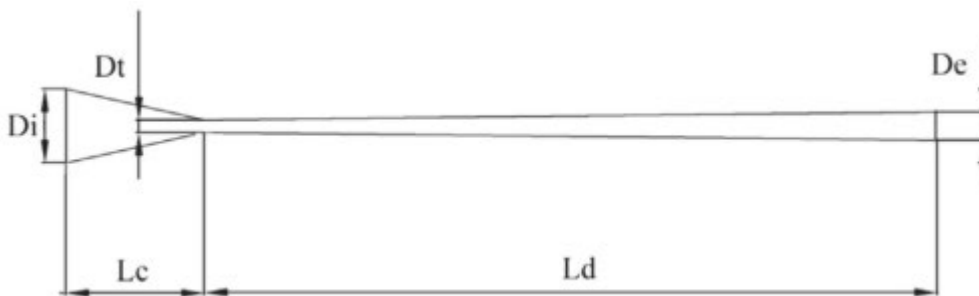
Schematic dimensions of cold spray nozzle geometry[5]
